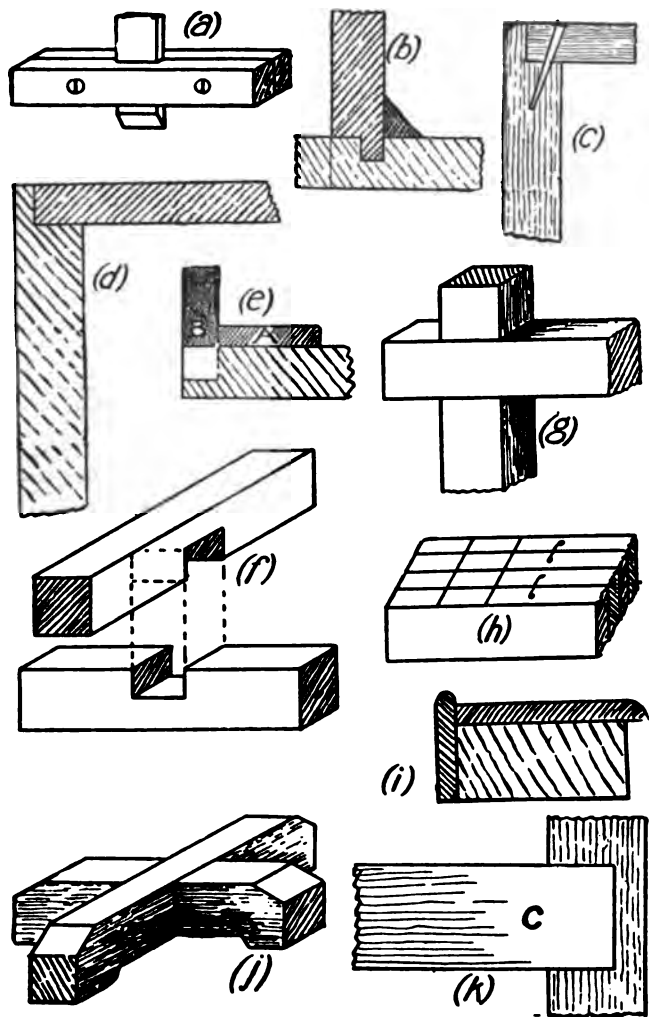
(a) "Old woman's tooth" for cleaning grooves; (b) tongued joint; (c, d, e) rebate joints; (f, g, i, j) "halved" joints; (h) marking-off for halved joint; (k) "stopped" halved joint.
